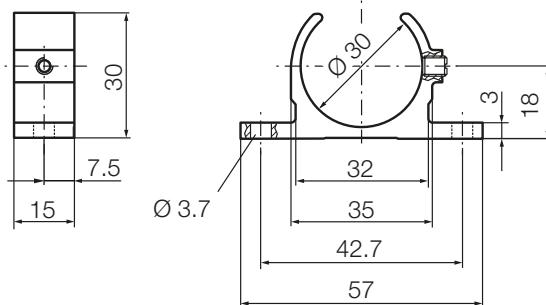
Mounting bracket BTL6-A-MF01-A-43
